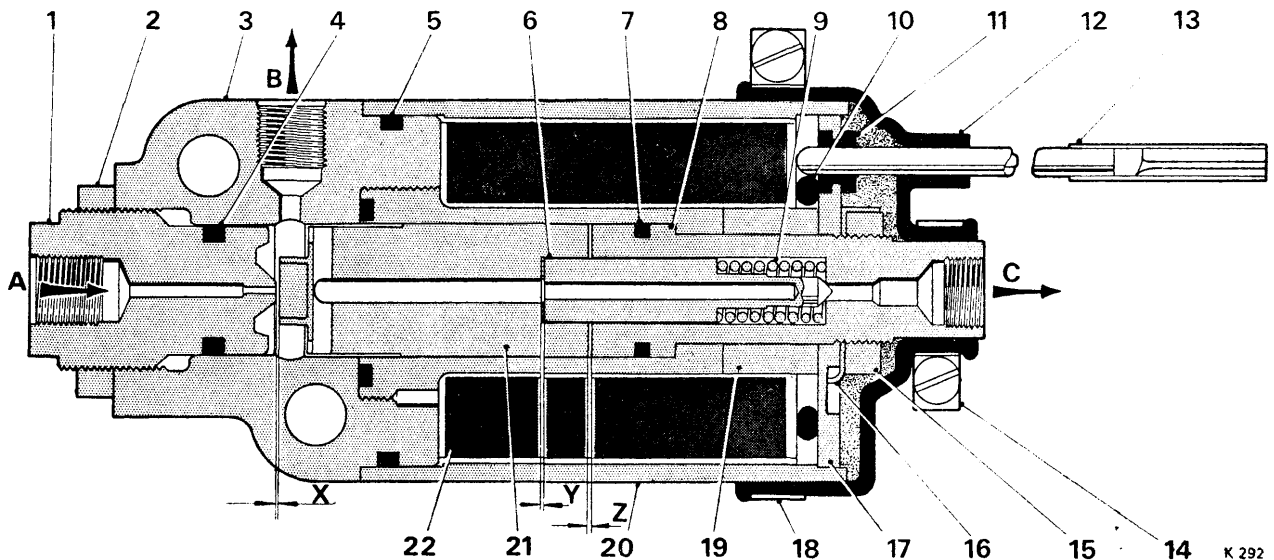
SECTIONAL VIEW—HEIGHT CONTROL SOLENOID VALVE
